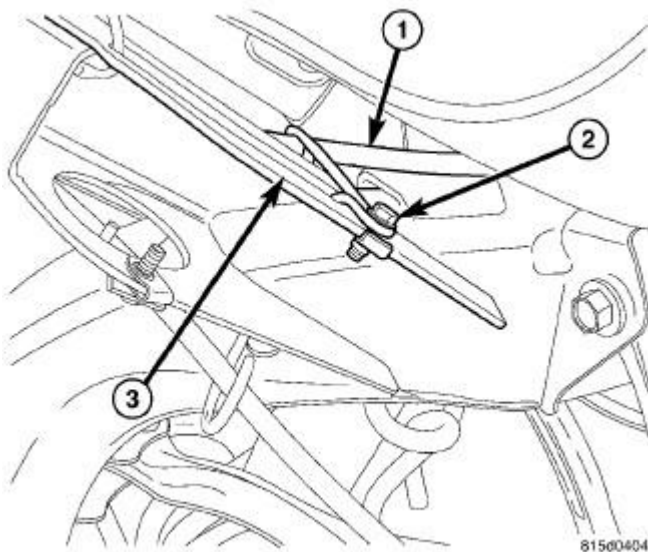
FRONT CABLE AT LEFT FRONT OF CROSSMEMBER
